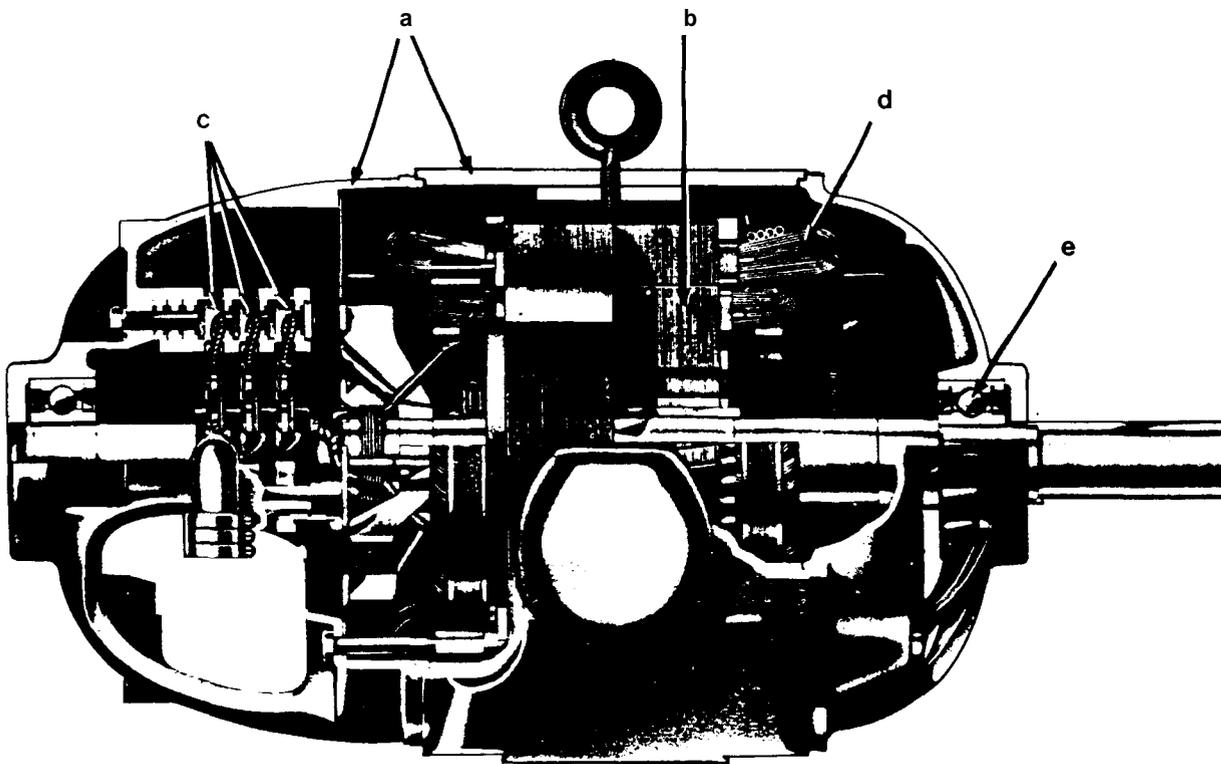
Cutaway View of Wound-Rotor Induction Motor: a) Housing, b) Roto Assembly, c) Slip Ring Brushes, d) Stator Windings, 3) Ball Bearings.
